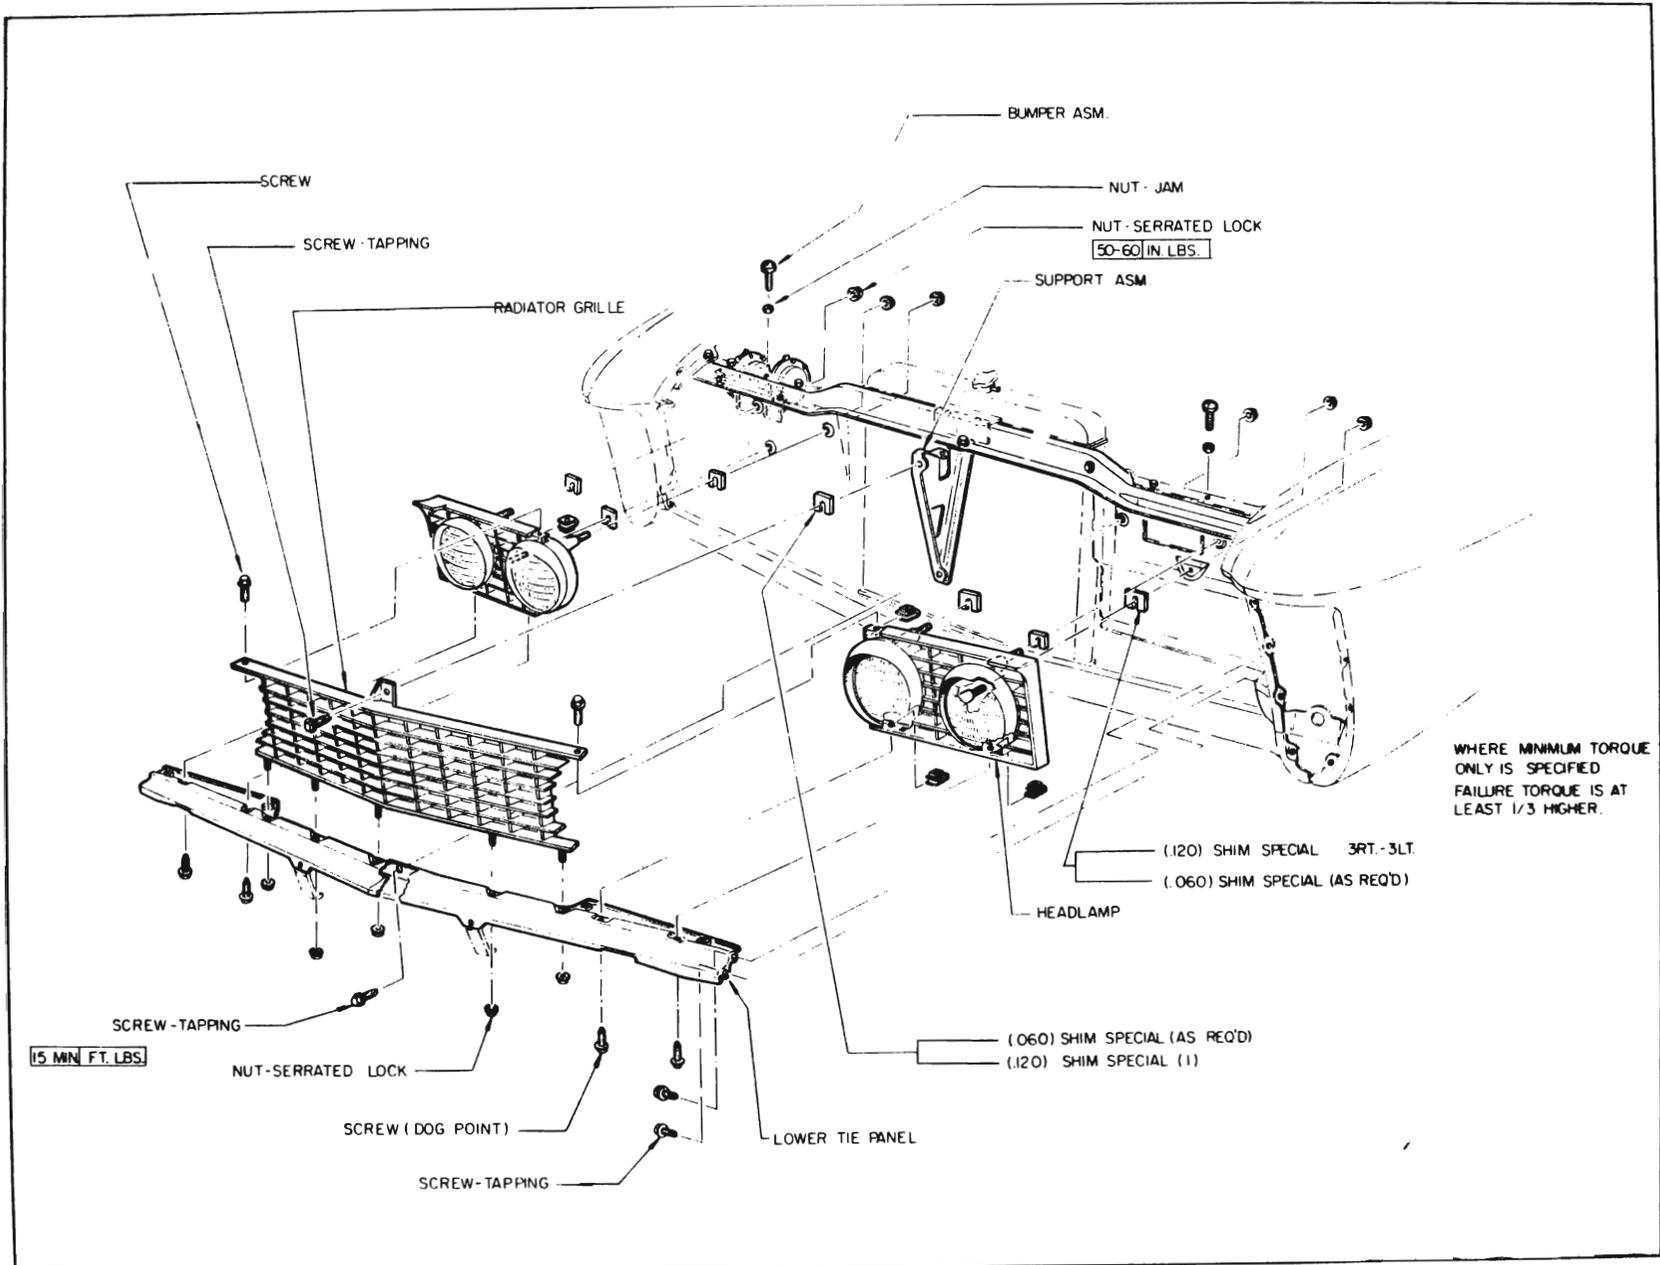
Radiator, Grille, & Headlamp Installation—4700 Series
